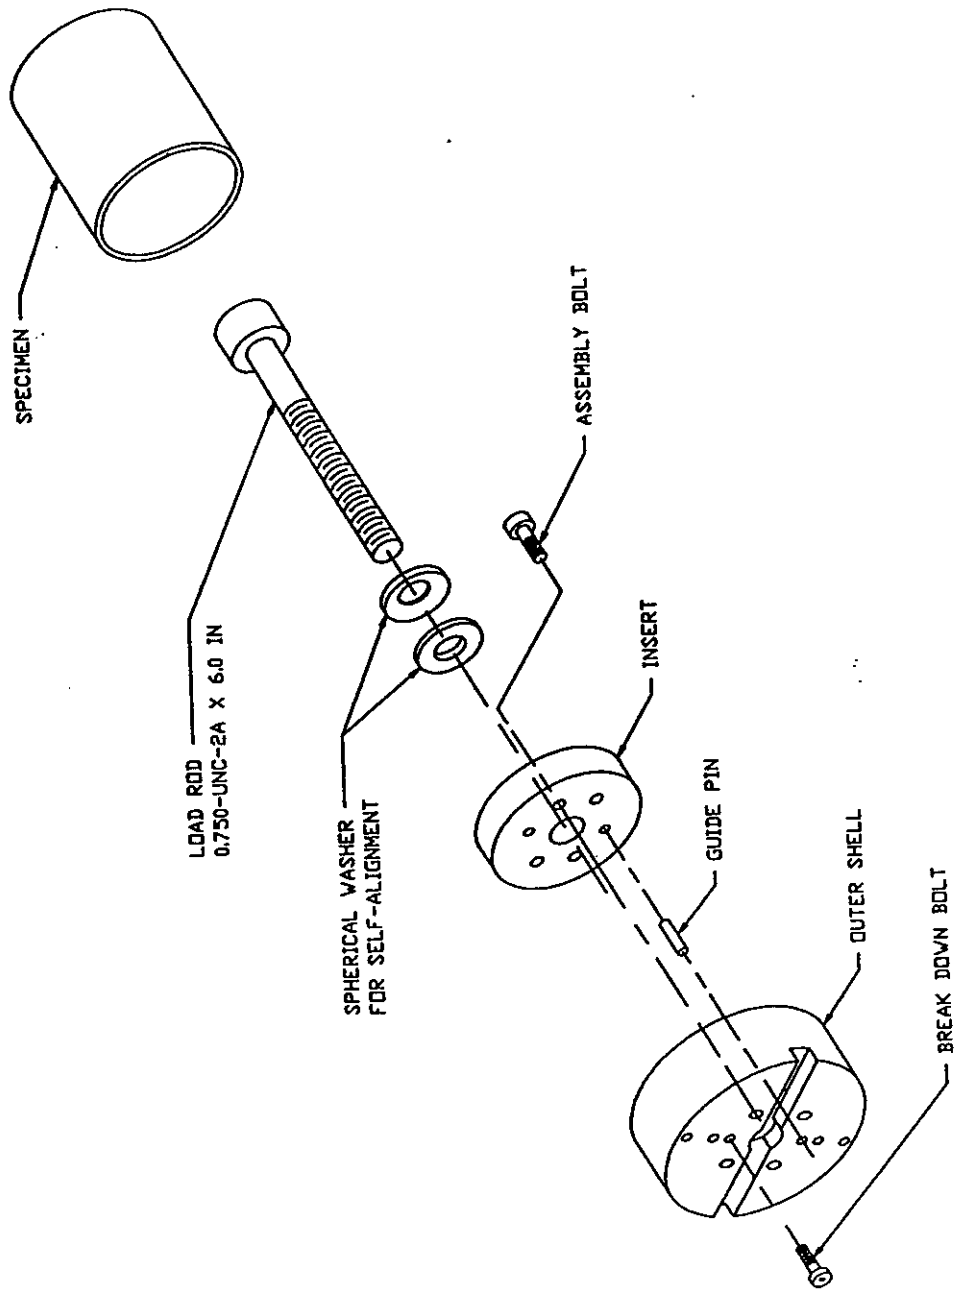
Assembly Drawing for Tension Fixture and Specimen
